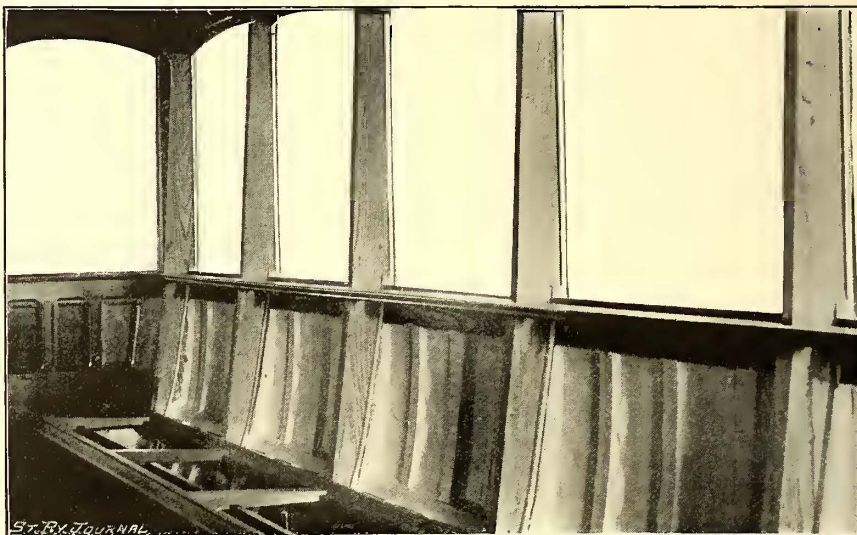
INSIDE OF CAR FOR WEST END RAILWAY, SHOWING GUM BLOCKS IN POSITION.
